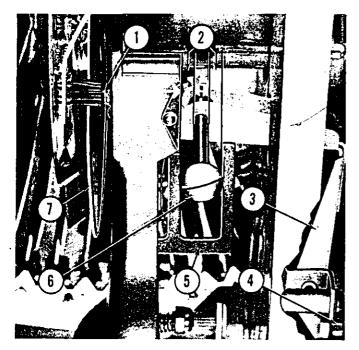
TONE ARM LATCH BRACKET CLEARANCE
